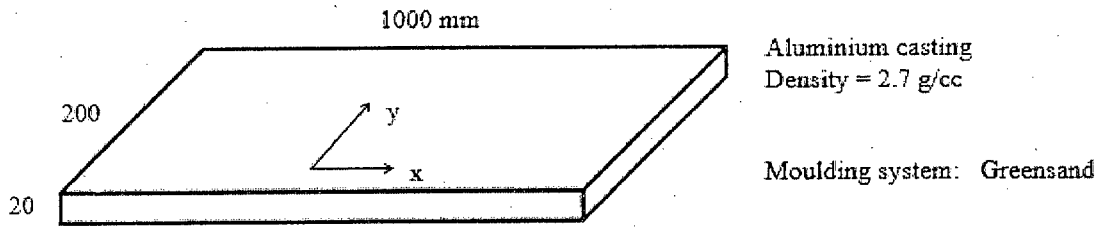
for Q. #1: Shape and dimensions of the casting .
